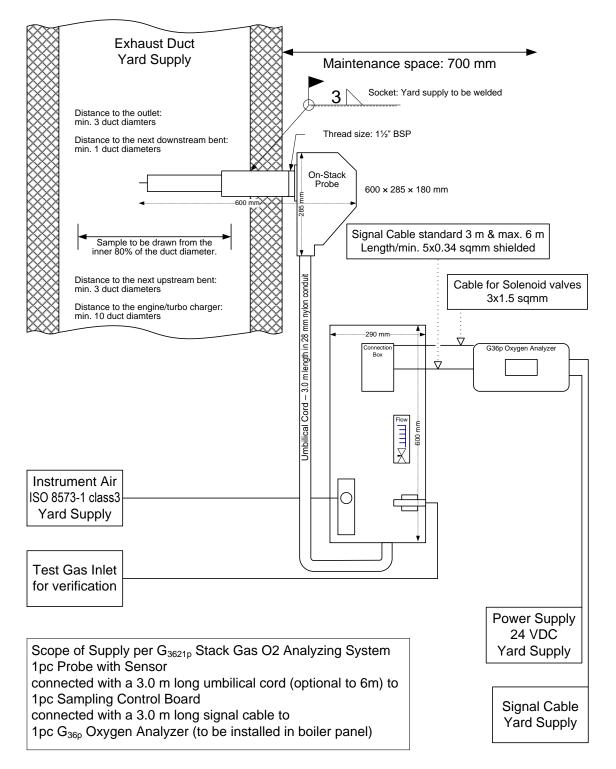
Installation Layout of the G3621p with Thread Type Probe
